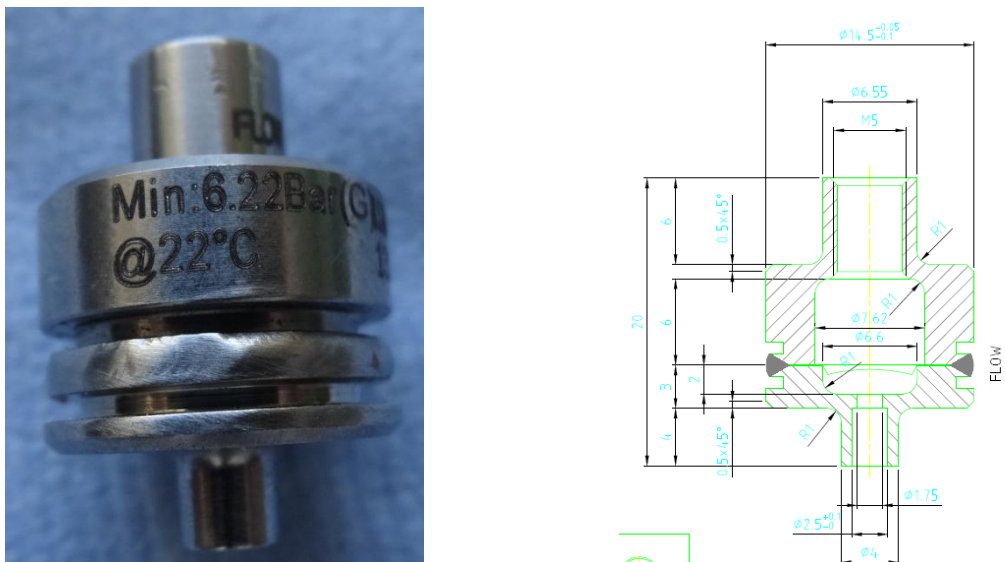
Burst disk housing to be mounted in the MARINE fuel pins
